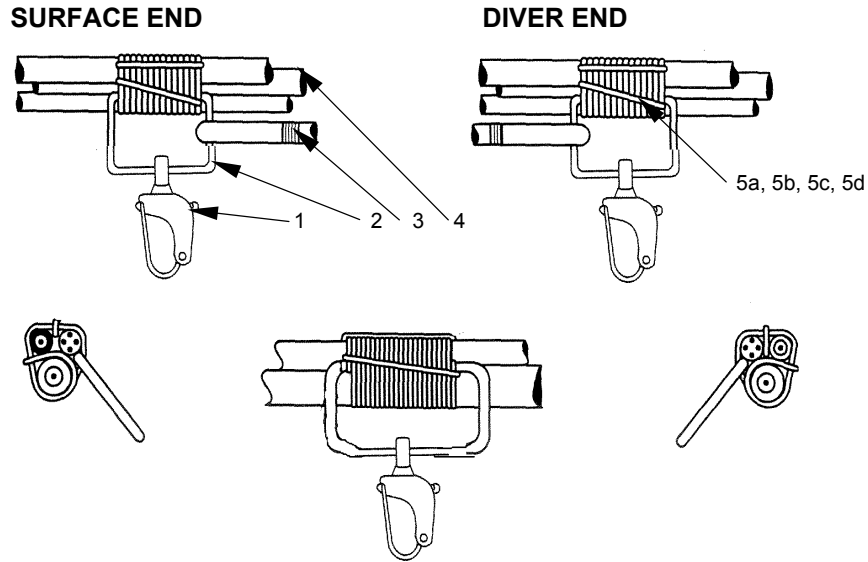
Seizing D-Ring to Umbilical Assembly
